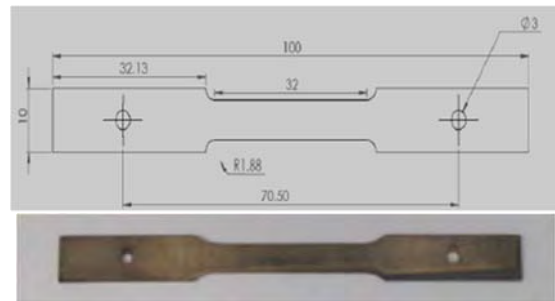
Zircaloy-4 sheet creep tensile specimen drawing and a photograph
